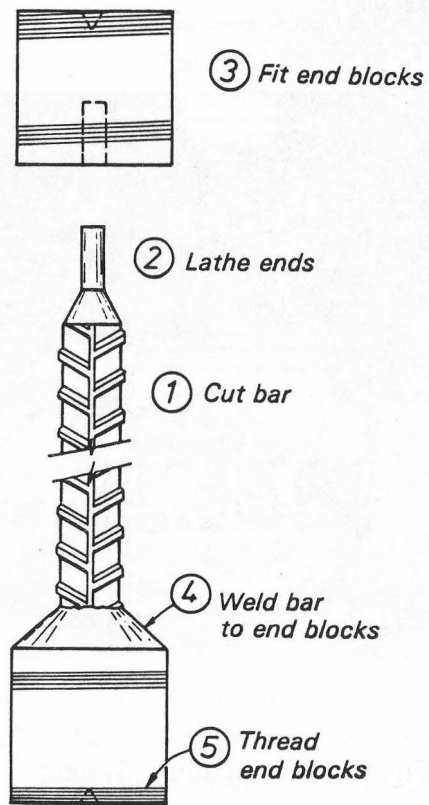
Manufacture Process of Deformed Steel Coupons.
